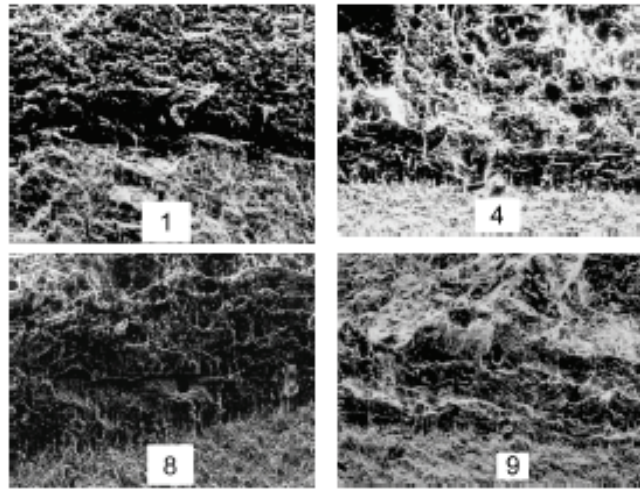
Final stretch zone recognized after point B in Fig. 11 for different regions in welded joint (see Table 1)
